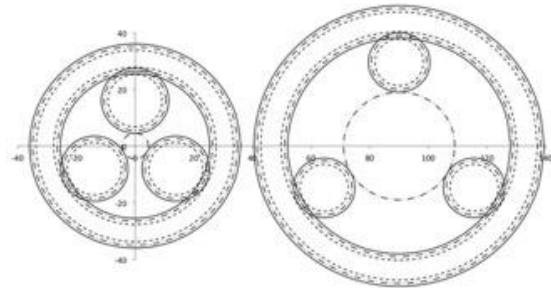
Comparison between the old and new gearing and central passage dimensions.
